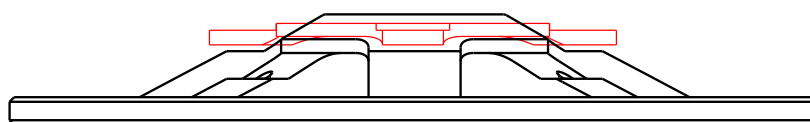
Drawing of the side view of the foil stretcher (red) placed over the stretching cone (black), to demonstrate the stretching technique.
